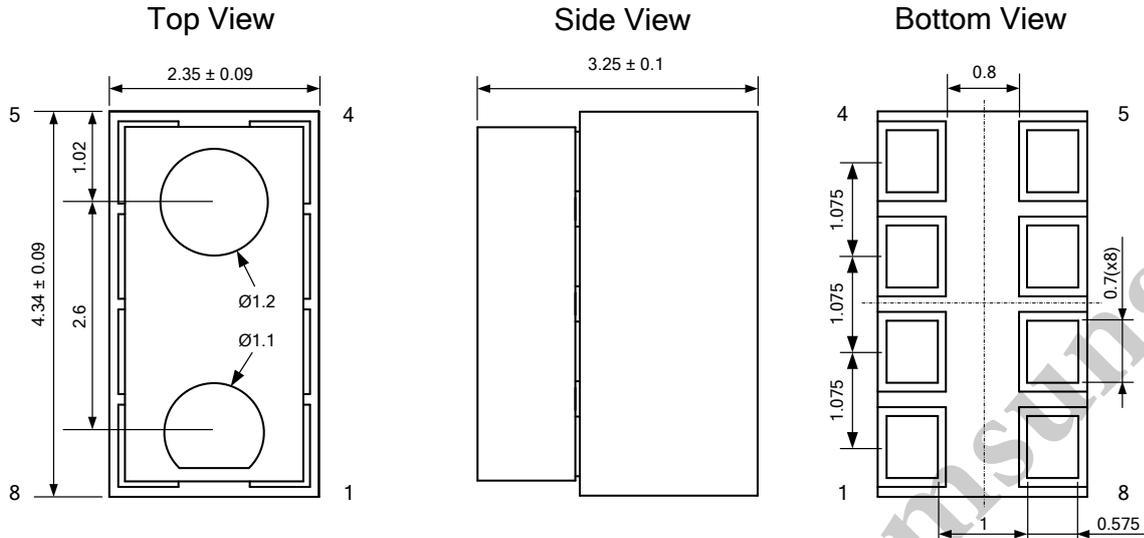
CM36652M3OE-H2 Package Dimensions
